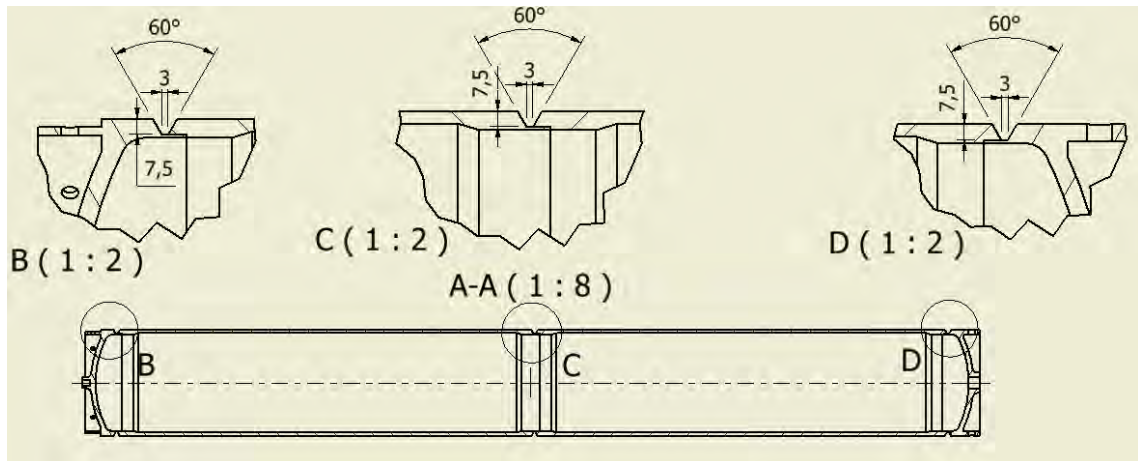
Section drawing of the PV-1 oxidiser tank three-section assembly, showing the weld preparation details.
